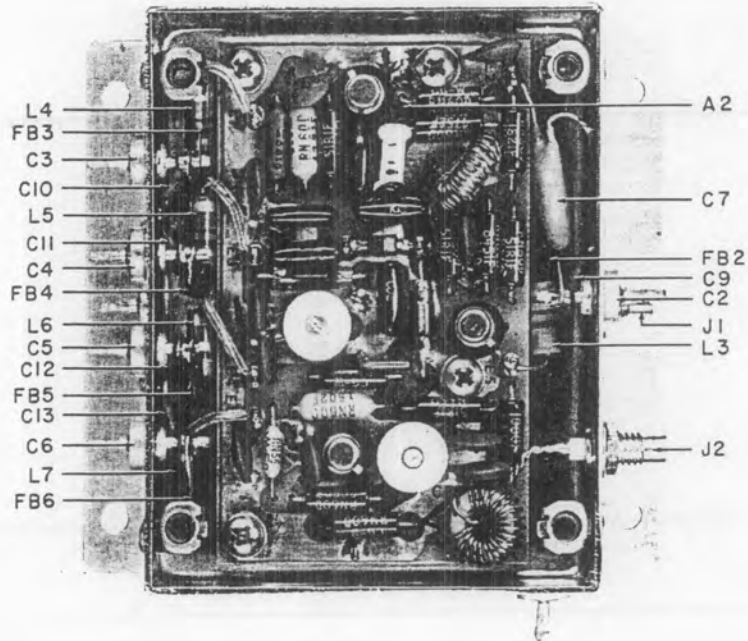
Type 7781 Oscillator Assembly (A3), Top View, Location of Components
